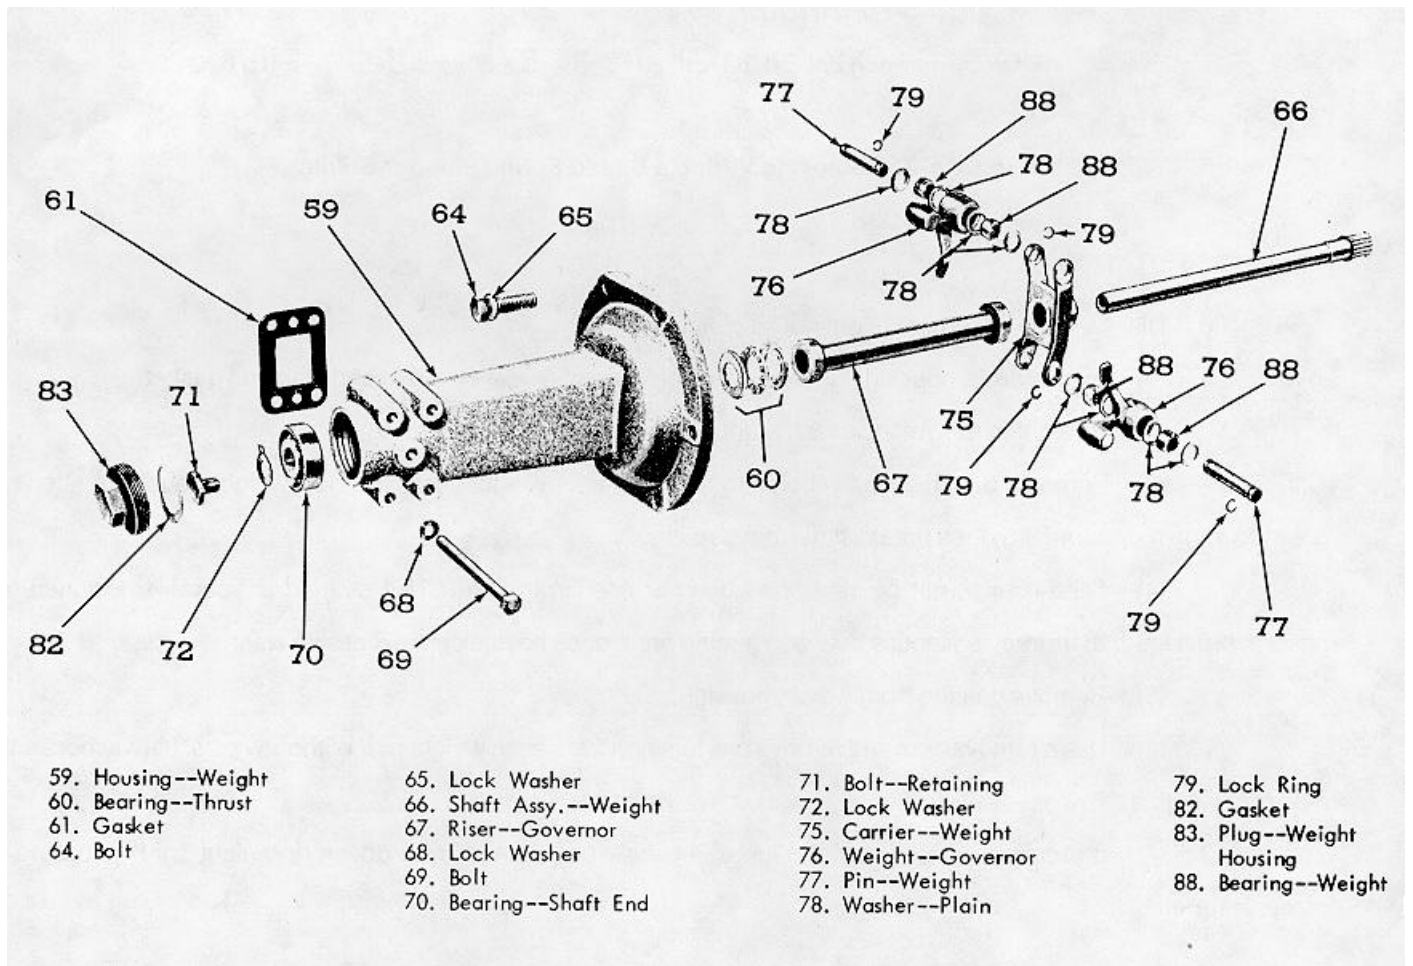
Remove Governor Weight and Shaft Assembly.
